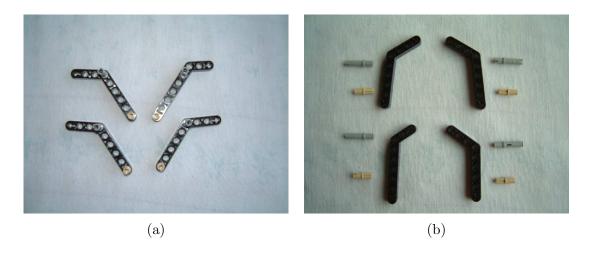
Module 7: (a) the assembly of the connectors of the lower transmission; and (b) its Lego pieces
